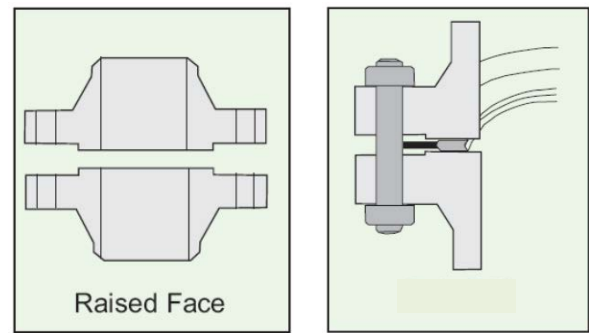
“Hard” joint, raised face flanges with a spiral wound gasket equipped with an outer compression-stop ring [2]
